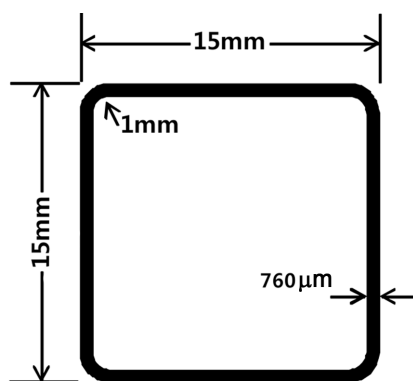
Screen printing geometry for laser sealing test.¹³⁾
